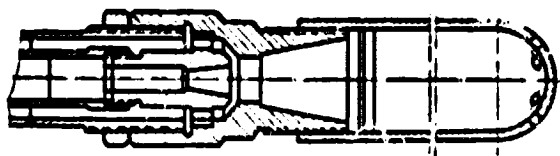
Head of the ejection spray nozzle with nozzle.
